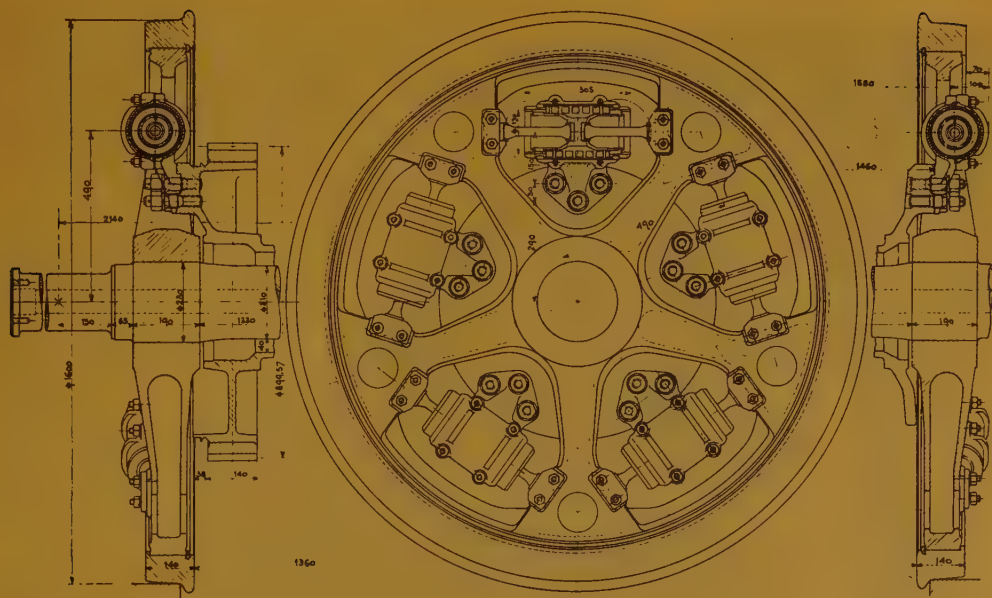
Elevation and cross-section of a SNCF driving axle with 1 600 mm. wheel, with Meyfarth-Secheron push-rod mechanism. See figs. 118, 120, and 121.
